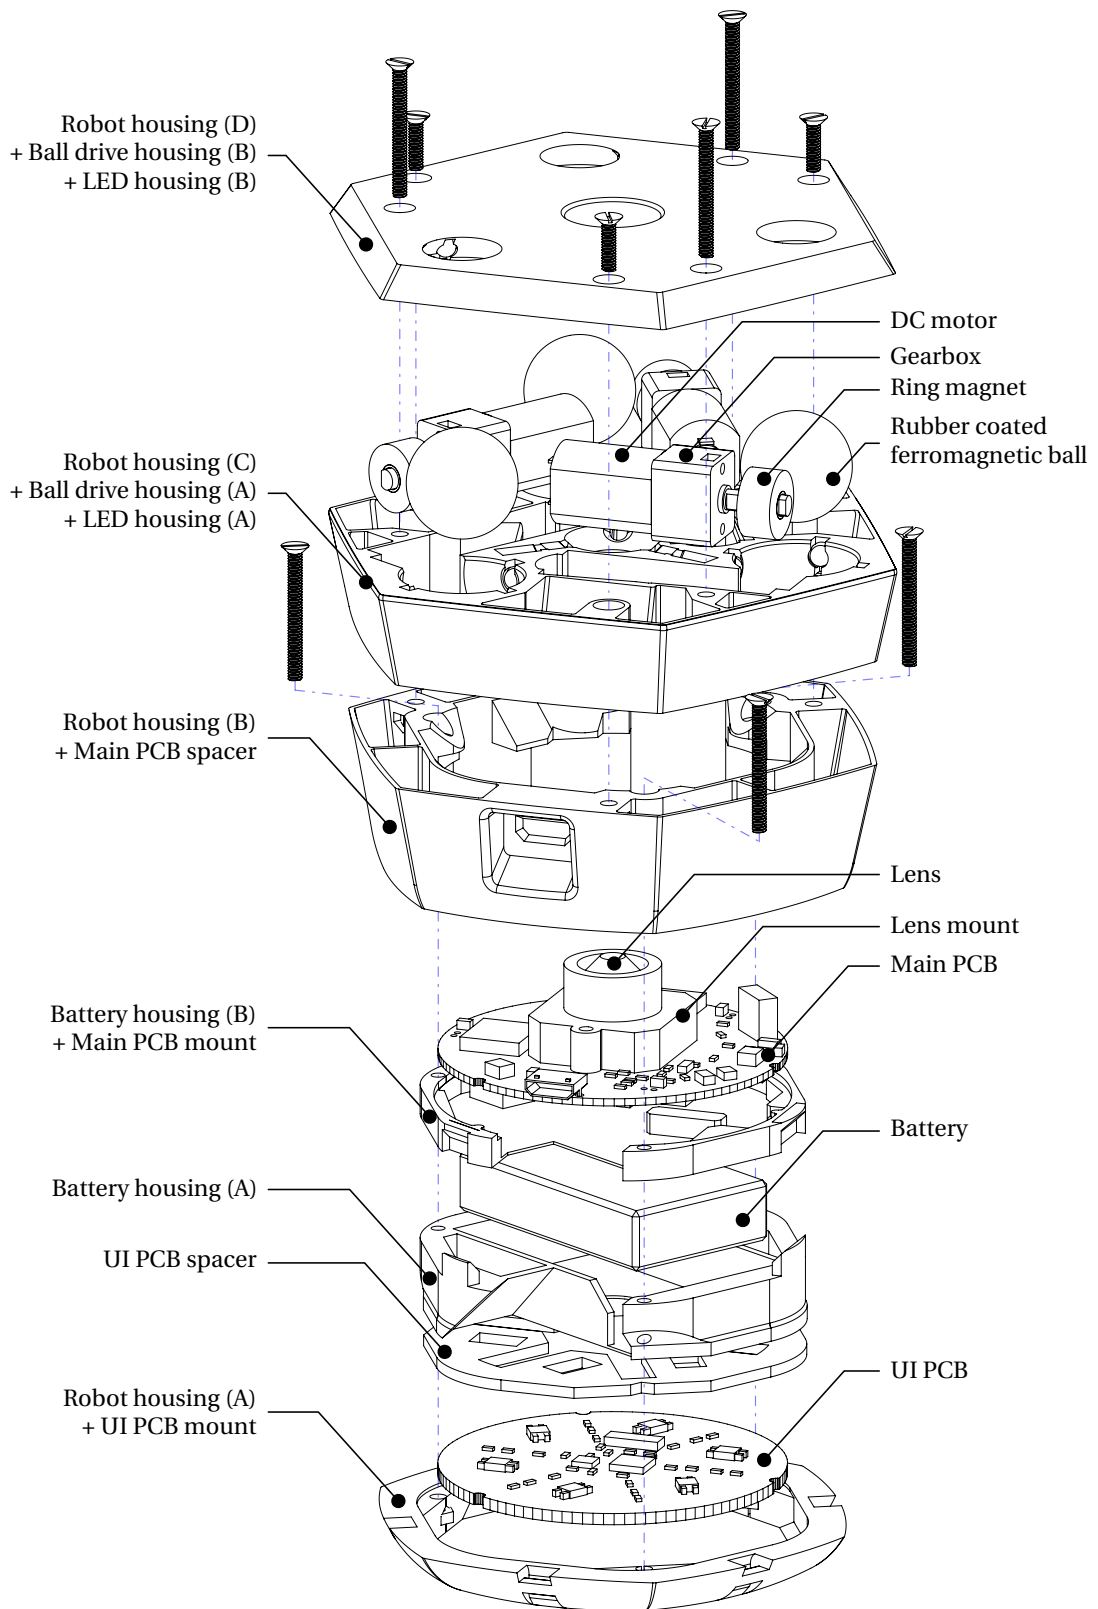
Exploded view of Cellulo robot version 2, upside-down. Screw routes shown in dashed blue. Battery cables, motor cables and PCB interconnect cable not shown.
